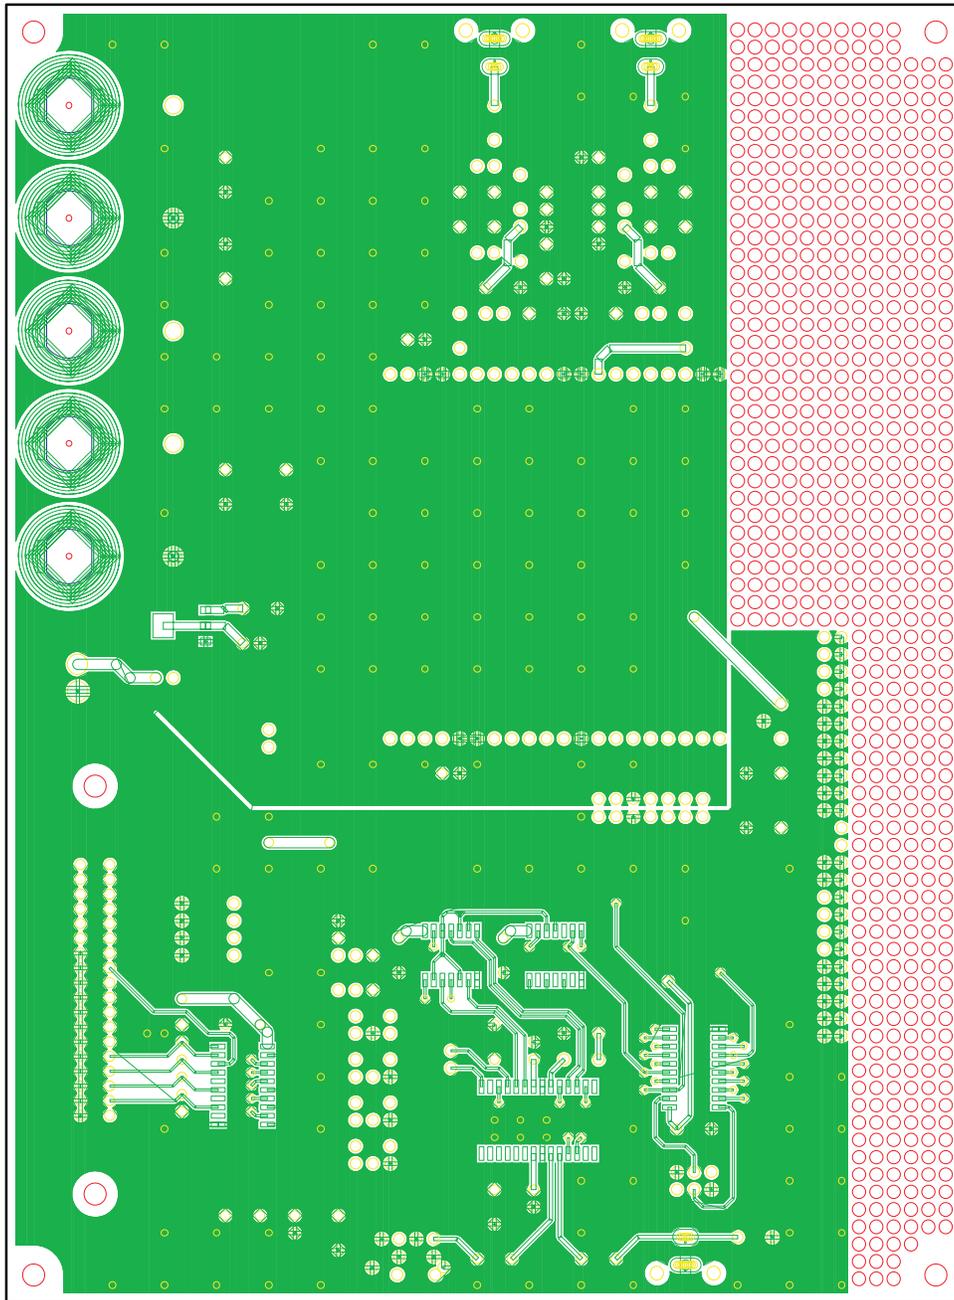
DEM-DAI/DAC Board Layout—Top (Component) Side
